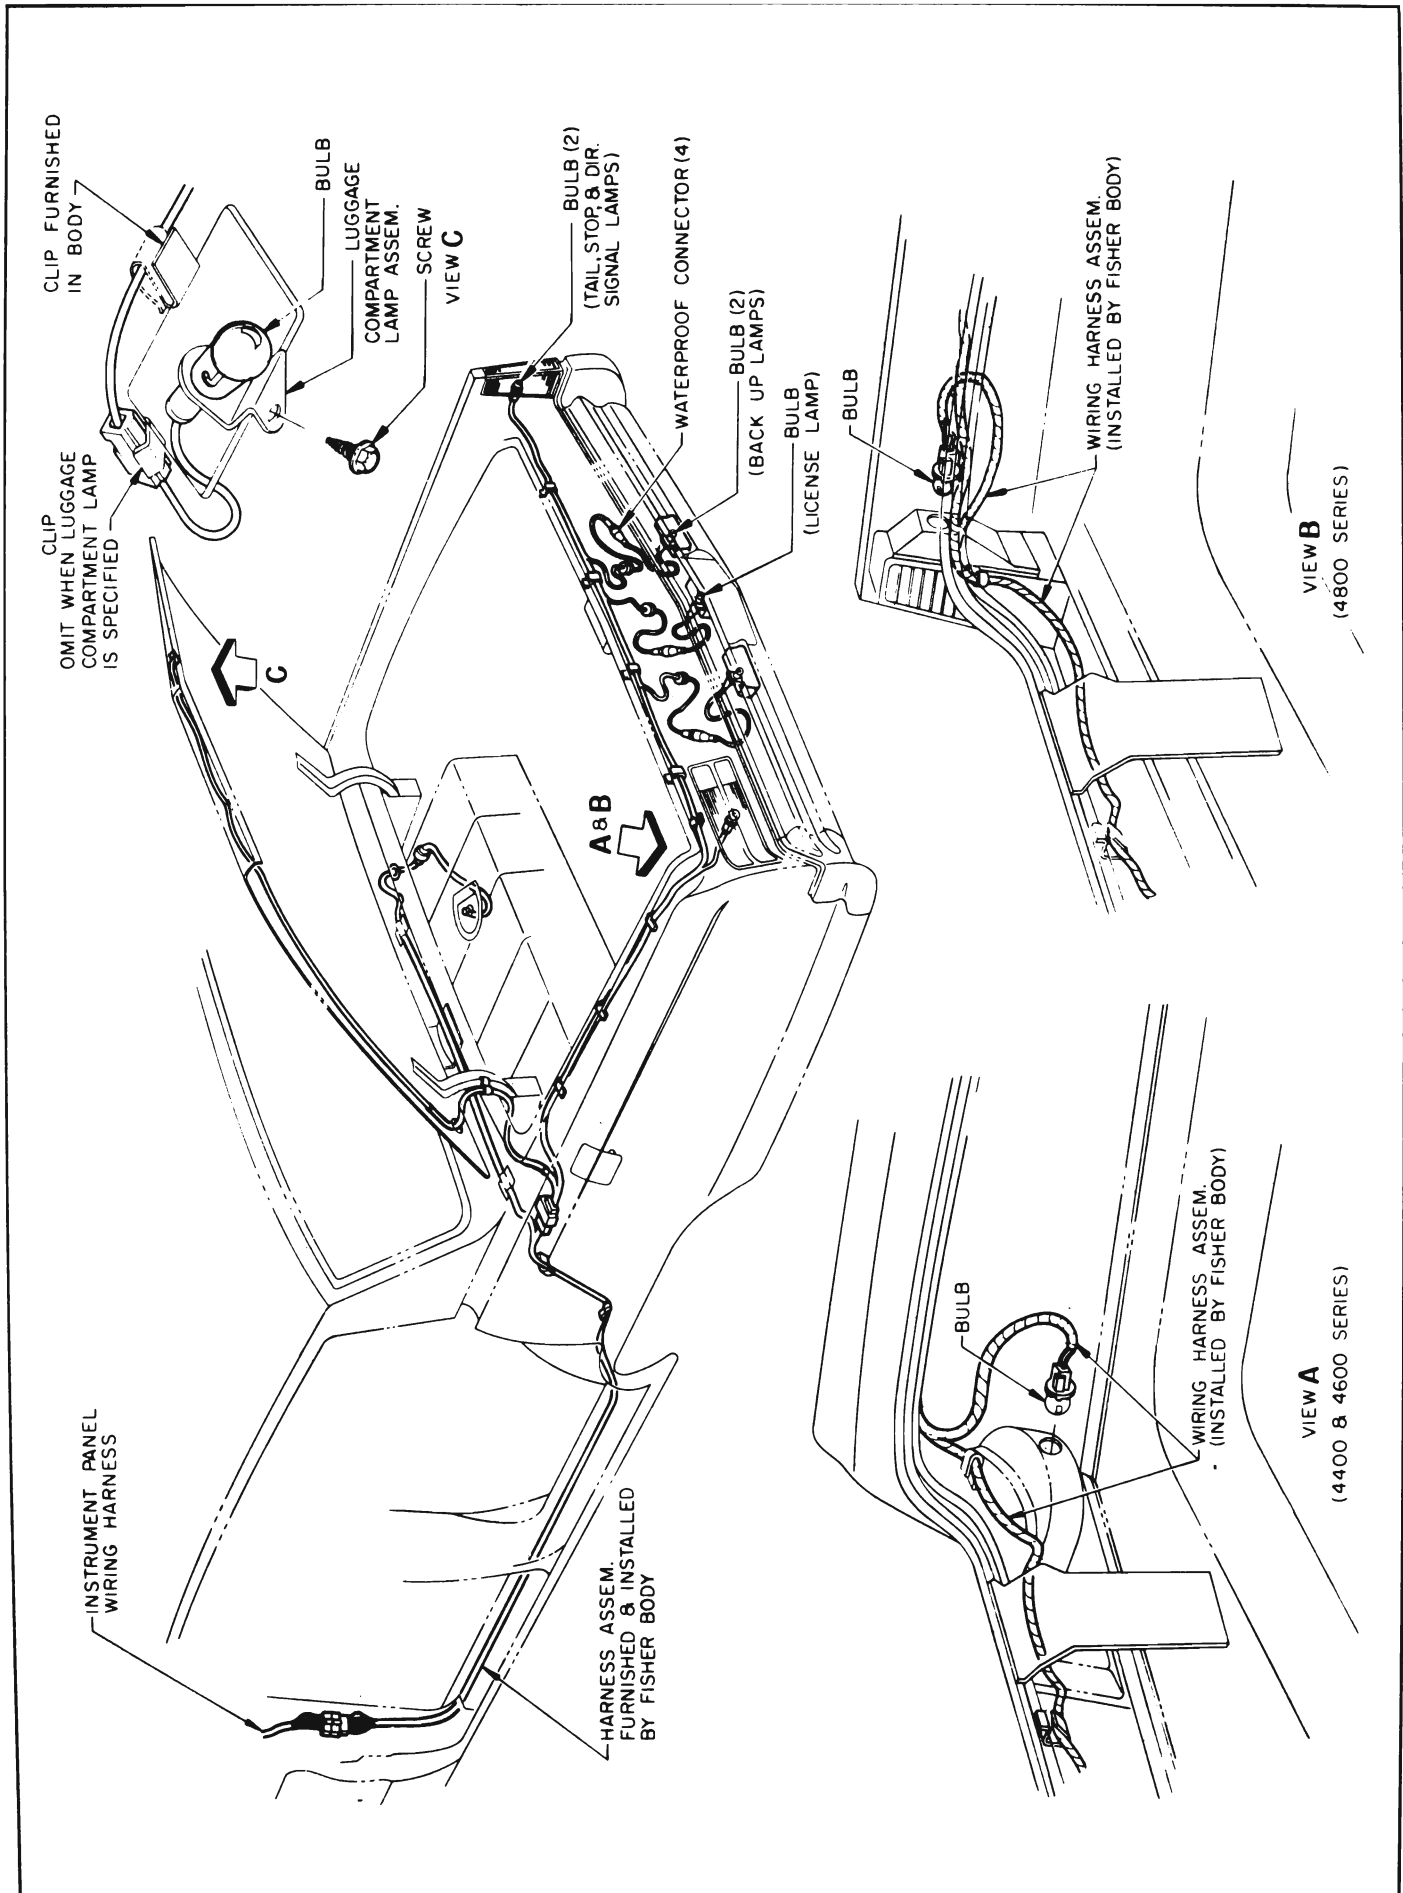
Rear Lamps and Fuel Gauge Wiring
